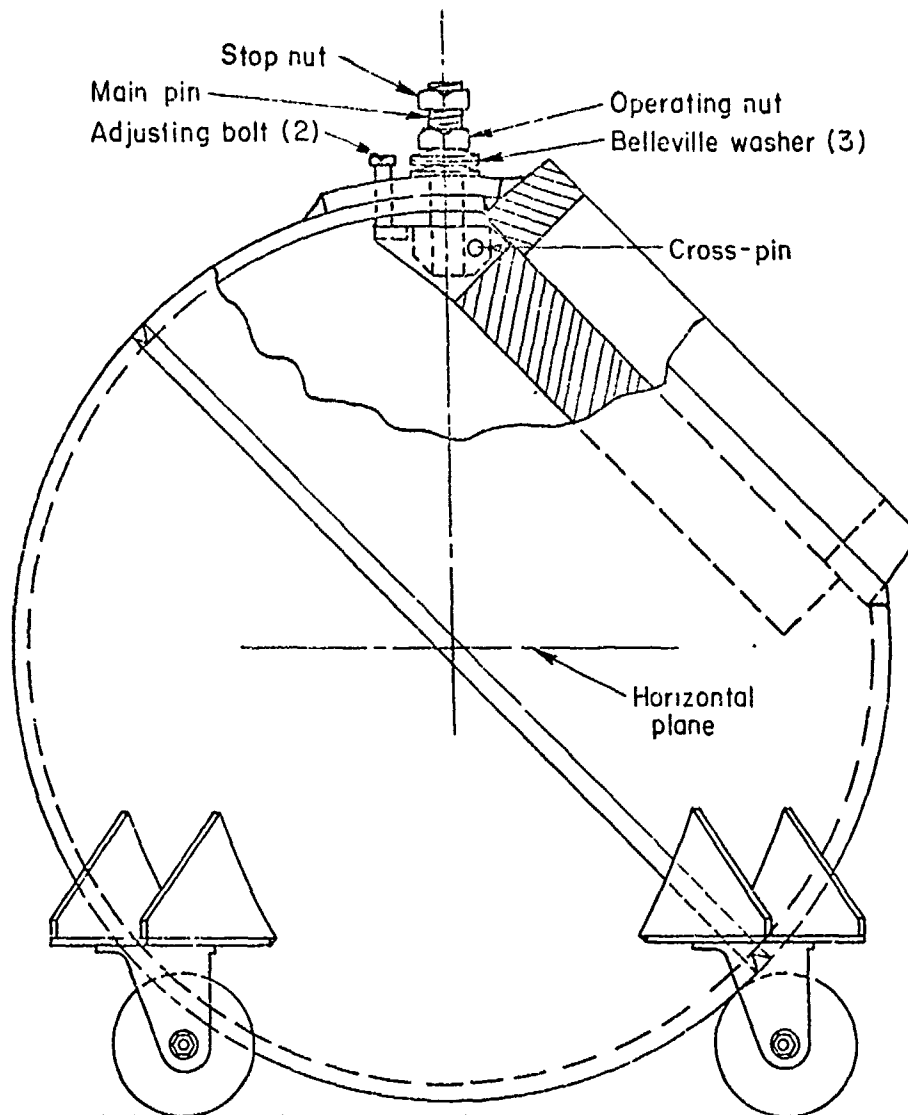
SCHEMATIC SIDE VIEW OF SPHERICAL CONTAINMENT VESSEL WITH SINGLE-PIN DOOR SUPPORT MECHANISM
